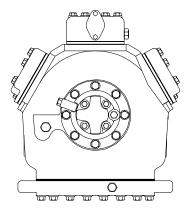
Compressor Pump End View 4.10 COMPRESSOR OIL LEVEL
